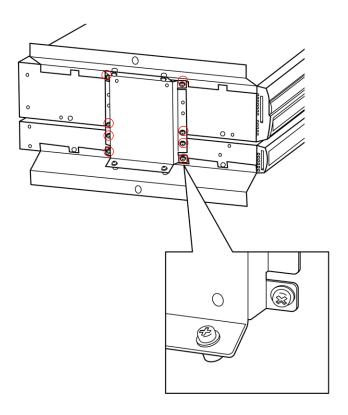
Attach Floor Mount Brackets to Chassis with Screws
